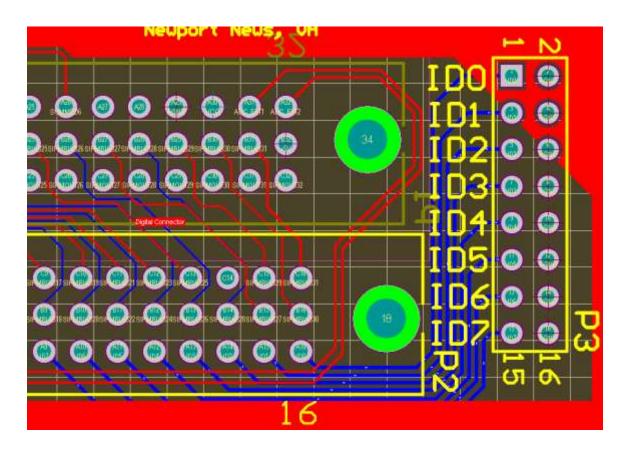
Close-Up of the Location ID Bus on the Backplane To ensure that the backplane remains properly light-sealed, we used a through hole header to eliminate the need for hollow vias to tap into the internal ground plane. Component through holes are filled with the component's own pins, as well as the solder used to attach the component. Vias, on the contrary, are typically left as open holes. While it would have been possible to manually plug vias with solder, it would just add an additional unnecessary step in the assembly process.
